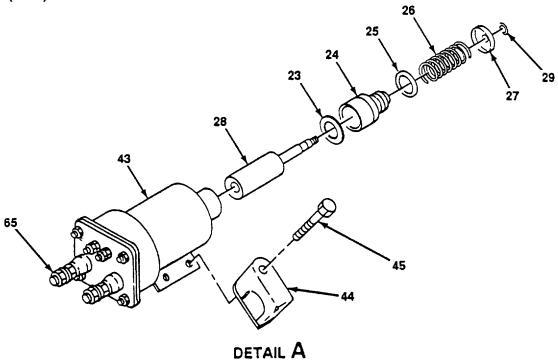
Starter, Assemble (Sheet 1 of 2).
